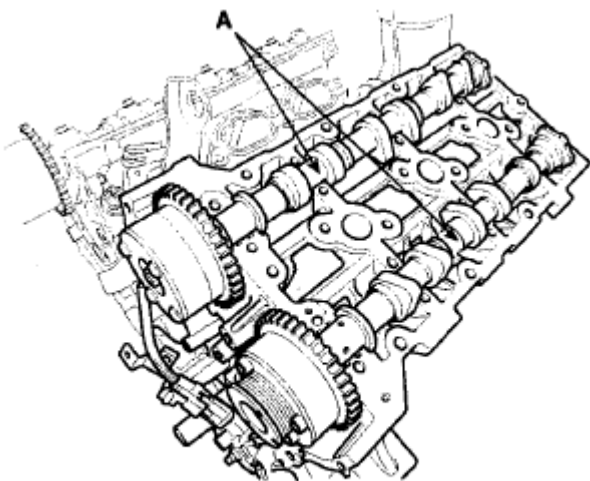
Identifying LH Camshaft Bearing Cap (A) And Thrust Bearing Cap (B)
